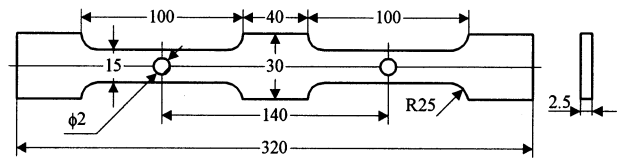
Specimen shape used for fatigue tests (dimensions in mm).
